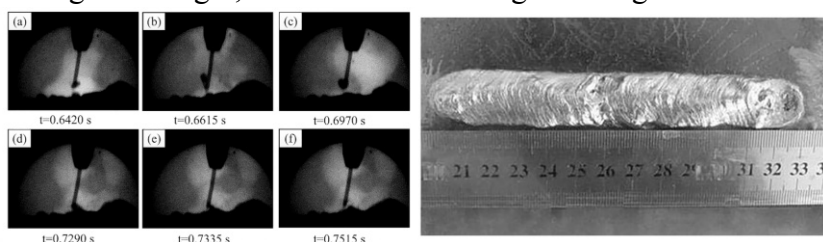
Metal transfer processes of the surface tension transfer mode and the weld appearance
